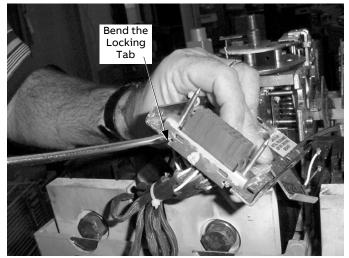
Bending the locking tabs to secure the trip unit plug to the mounting plate.
